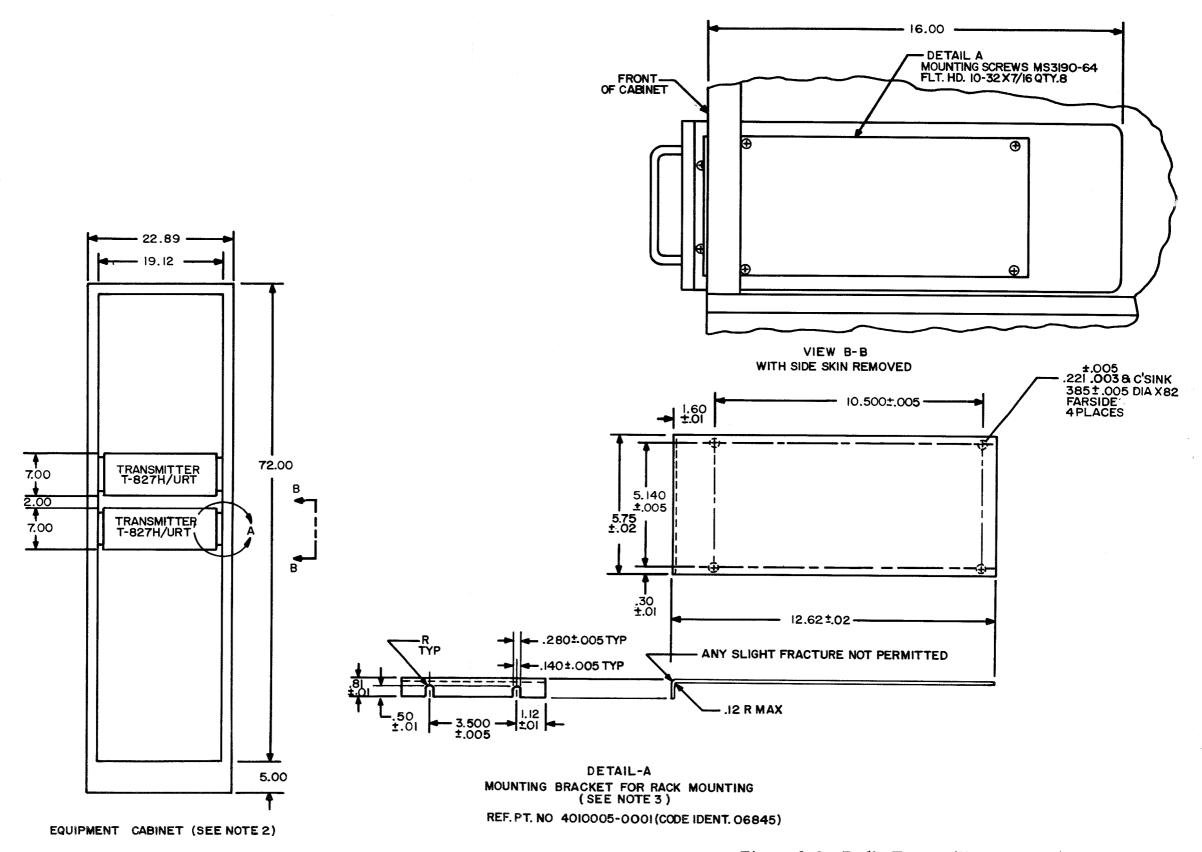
Radio Transmitter T-827H/URT, Outline and Mounting Dimensions (Sheet 2 of 2)
